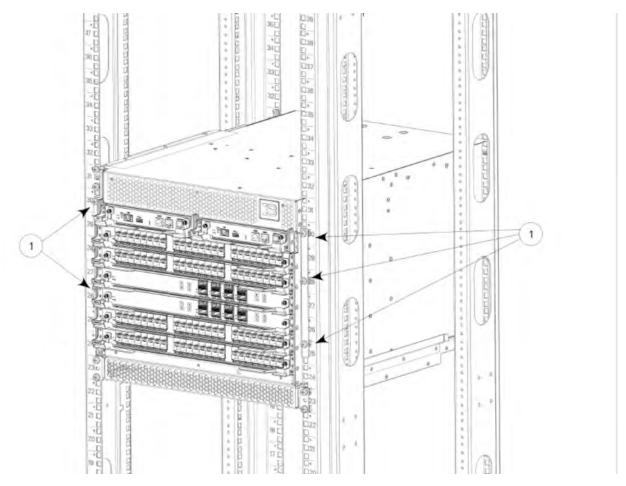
SAN Device with 18-24 in. (45.72 to 60.96 cm) Kit Installed in Rack
